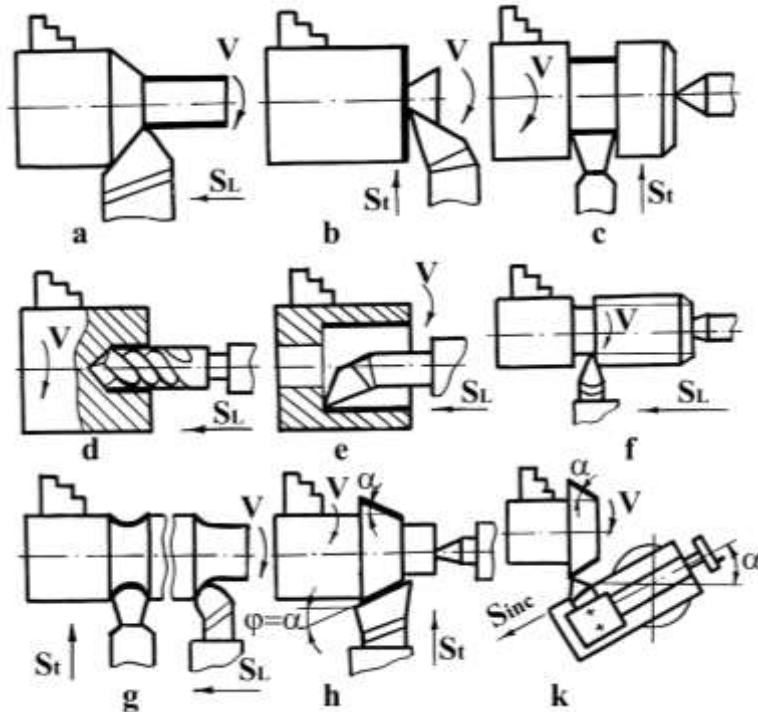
Cutting operation used in lathe work: a – turning; b – facing; c – necking or parting; d – drilling; e – boring; f – threading; g – forming; h, k – tapering
